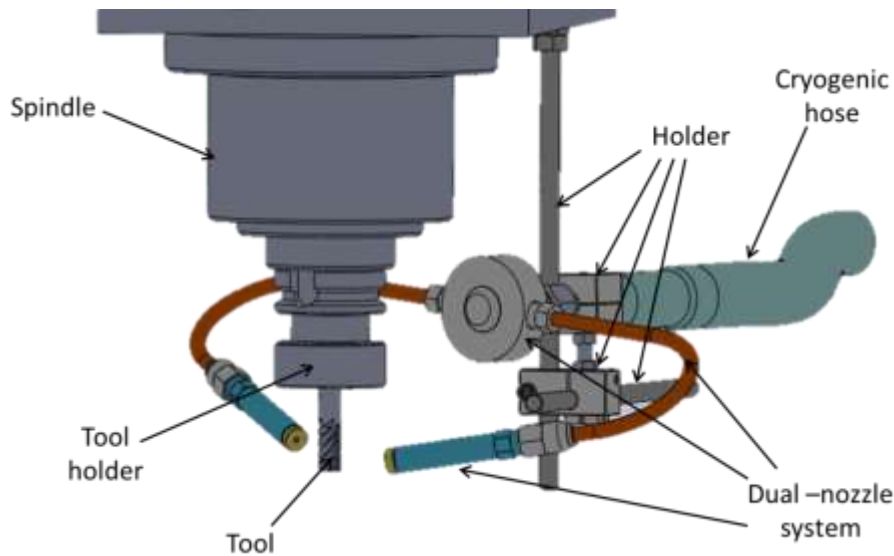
CAD model shows the retrofit of the cryogenic cooling system onto the machine tool frame
